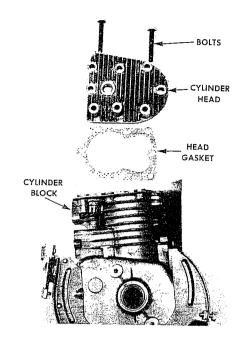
Bolts hold the cylinder head to the cylinder block.
